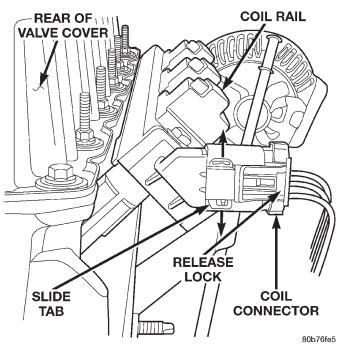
Ignition Coil Connector Removal—4.0L 6–Cylinder Engine
